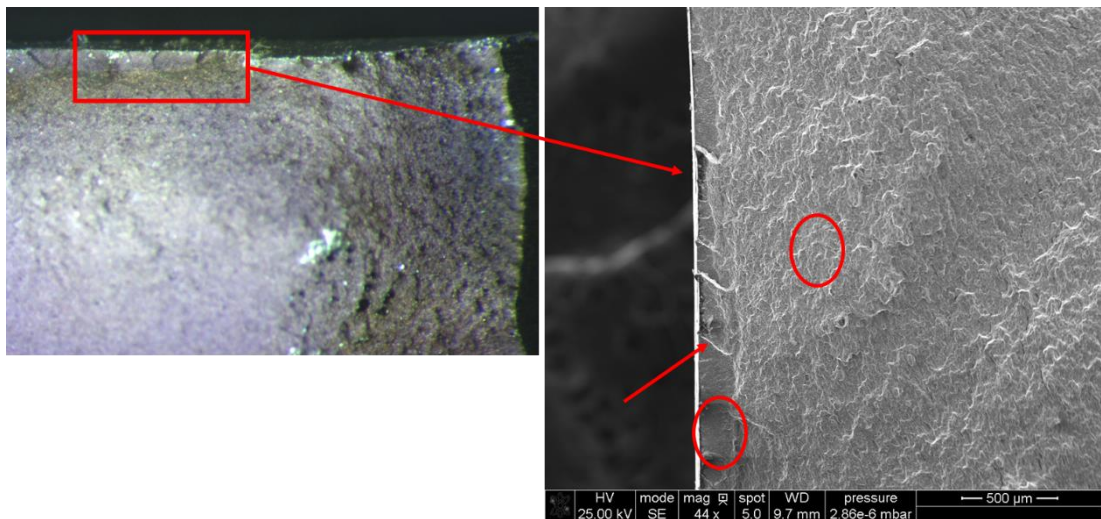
Fractured surface showing beach marks and ductile fracture
